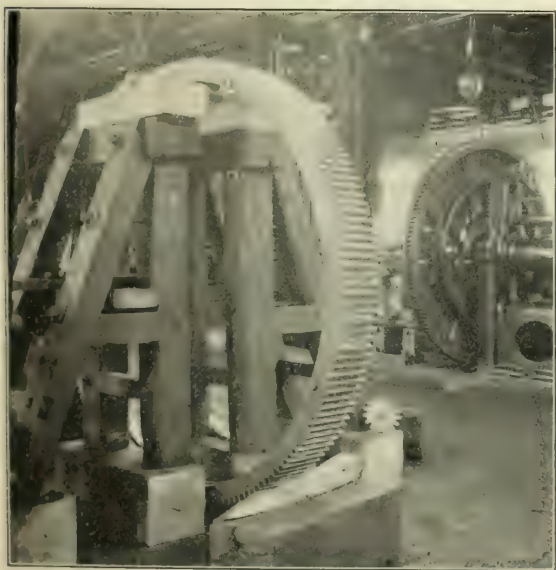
Steel Gear Rims in Position for Filing and Lathe to Which They Will Be Applied.
